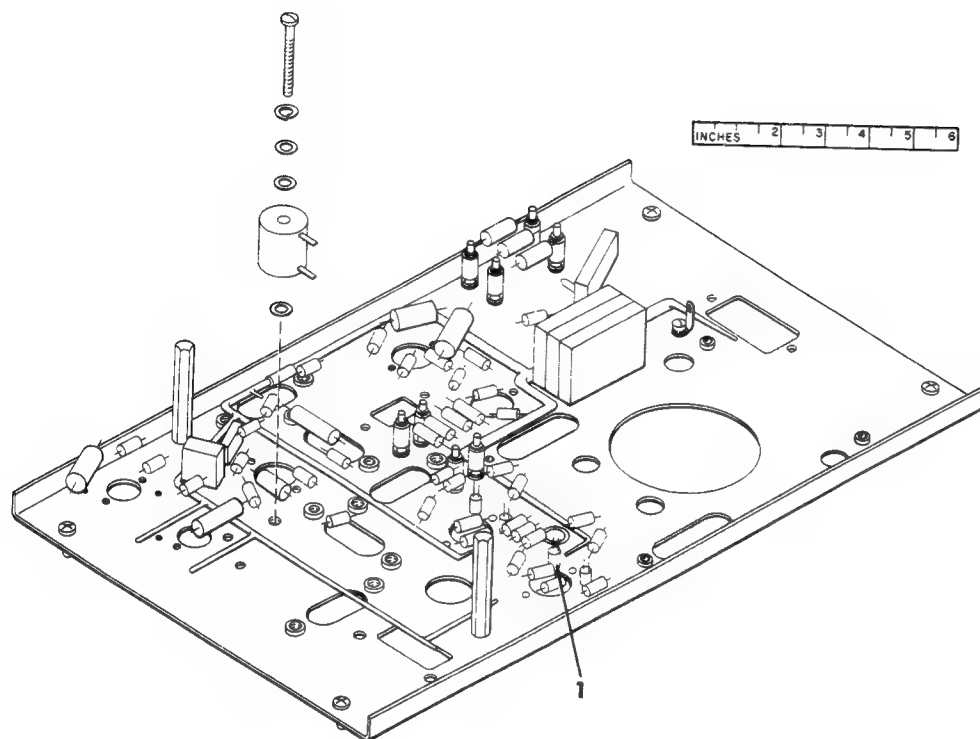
Generator, pulse O-300A/M (9000007)—partial exploded view
